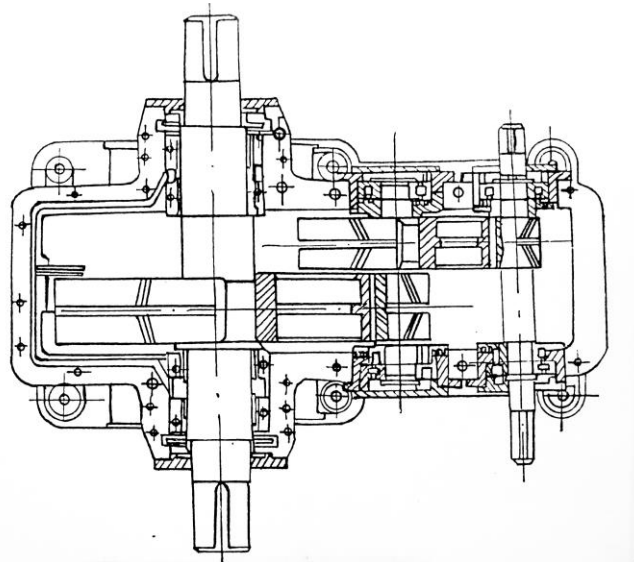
Gearboxes of the PH-5700 type of pumpjacks of the SK4-1800 type (Azerbaijan)
